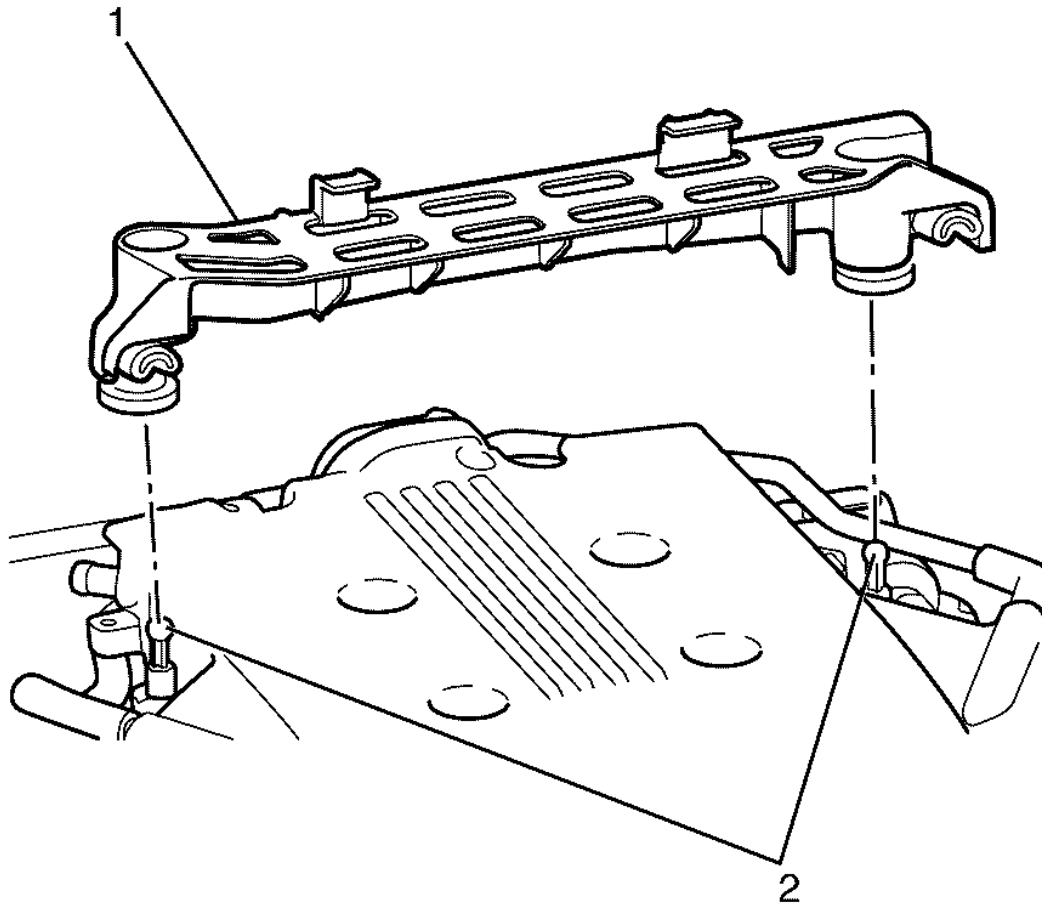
Identifying Noise Insulation, Intake Manifold Assembly & PCV Tube
